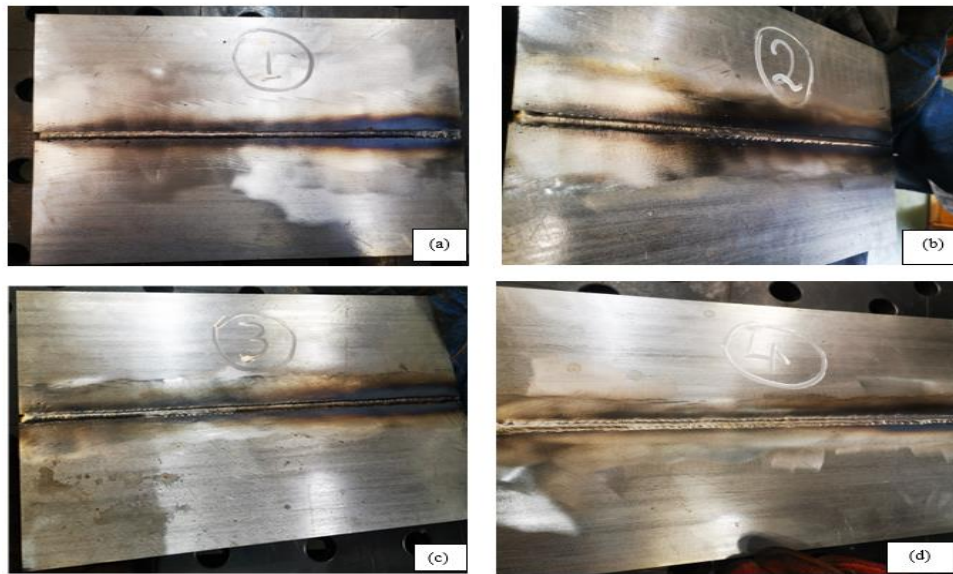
As welded plate for gas mixtures: (a) He, (b) 95Ar-5CO₂; (c) 98Ar-2CO₂; (d) 73Ar-25He-2CO₂.
